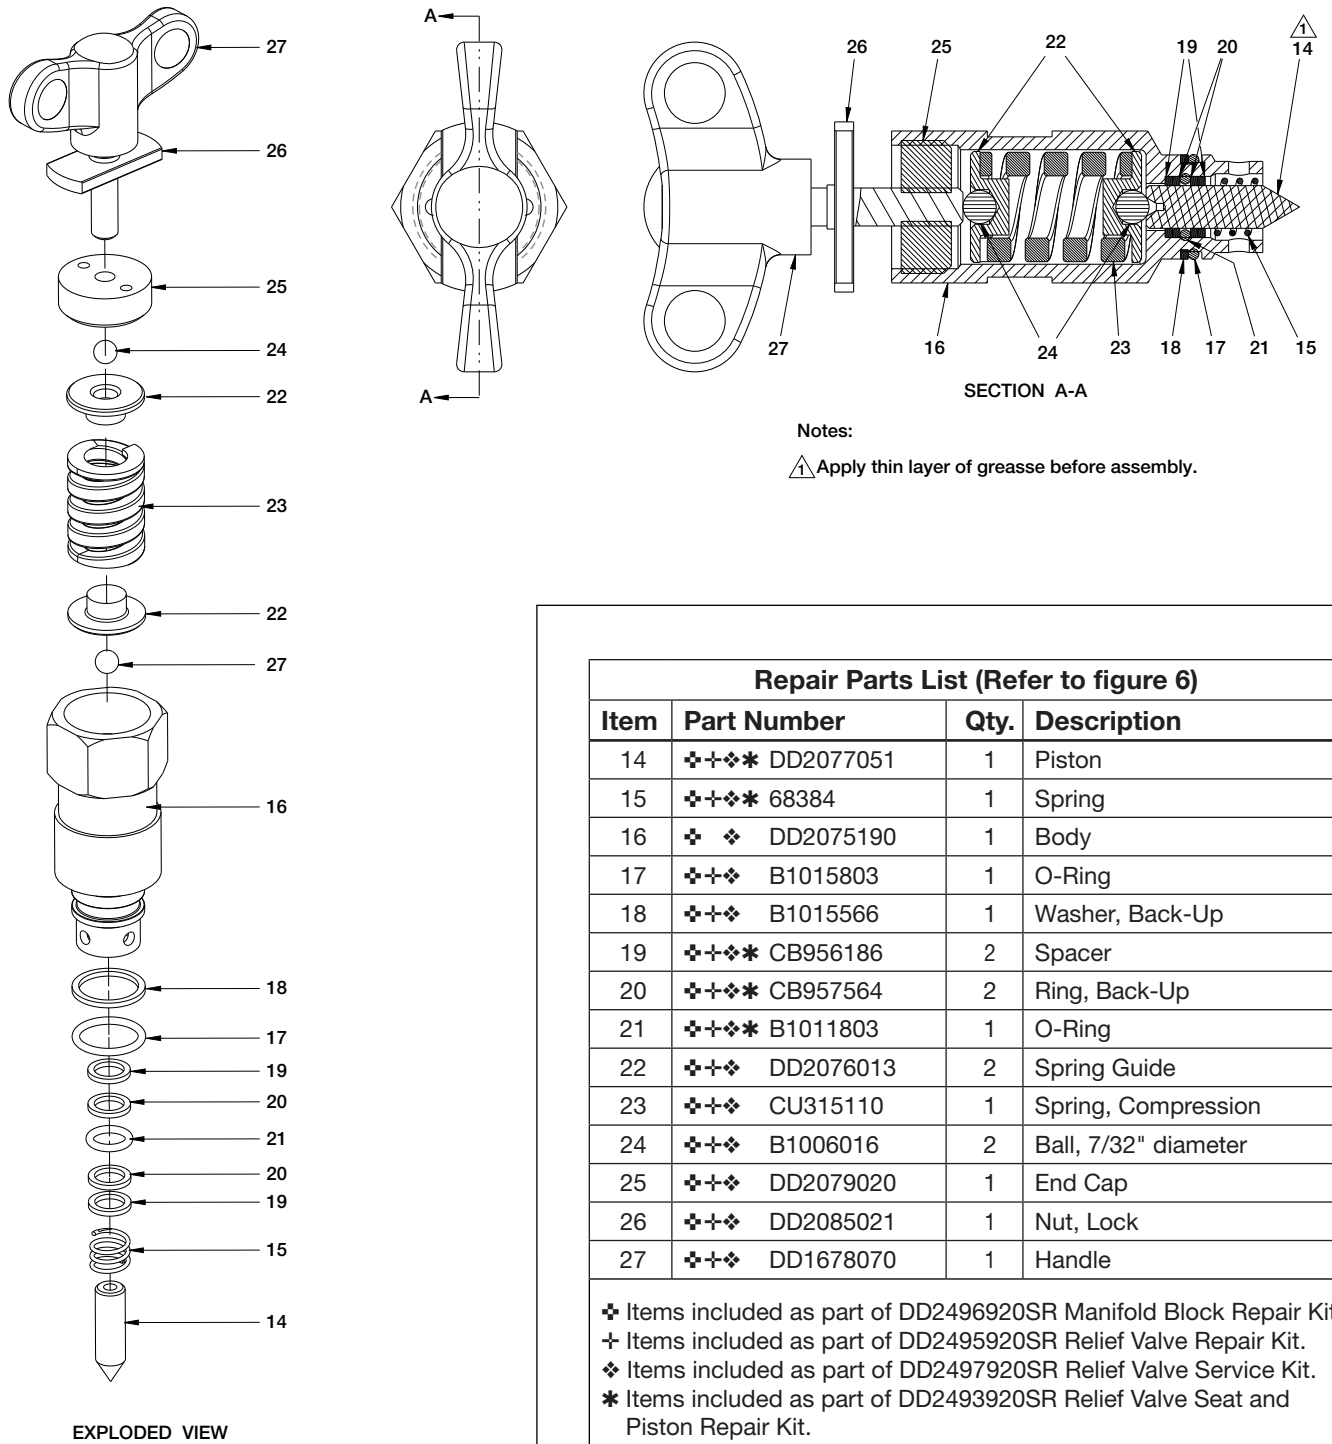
, Relief Valve, User Adjustable (MPARV Style)
